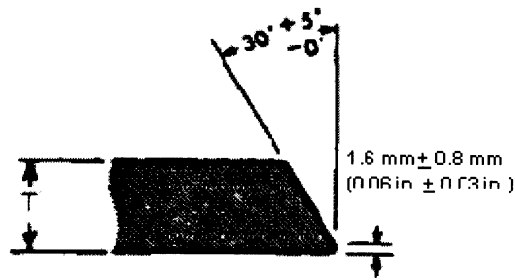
Bevel Detail for Wall Thickness (T), 22 mm (0.88 in.)^(a) or less
